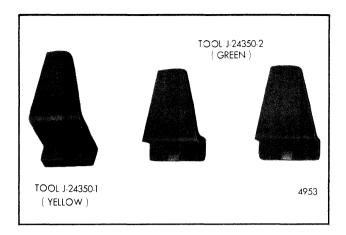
Glass Alignment Gauge Blocks - Tool J-24350 (Consists of a Set of Three Blocks)
